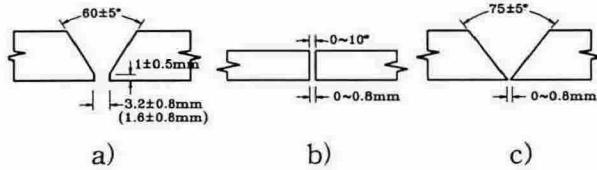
Welding joints of Cu-Ni pipe
